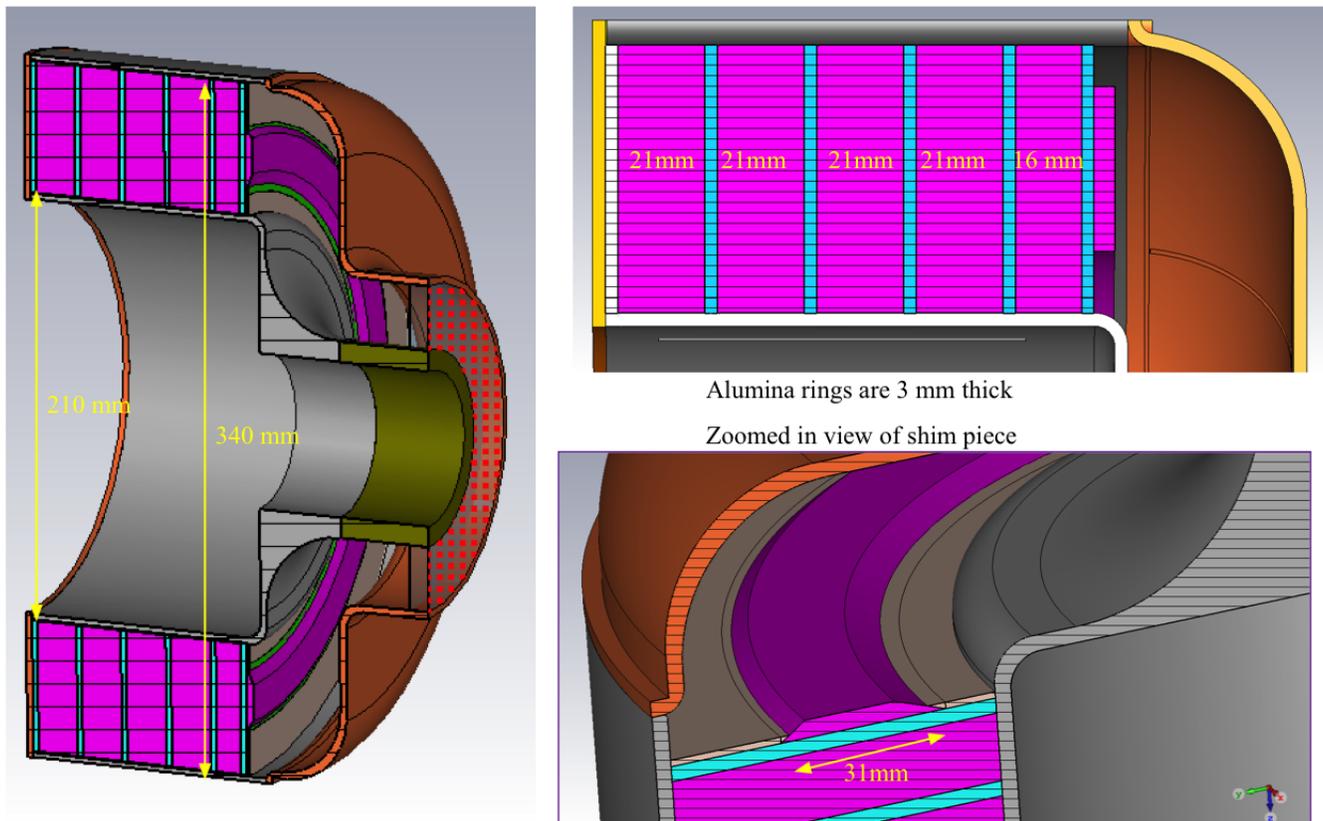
The tuner assembly consists of 5 garnet rings that are glued to an alumina substrate and a specially shaped shim piece. The shell is made of copper plated stainless steel with slits to reduce eddy currents.
